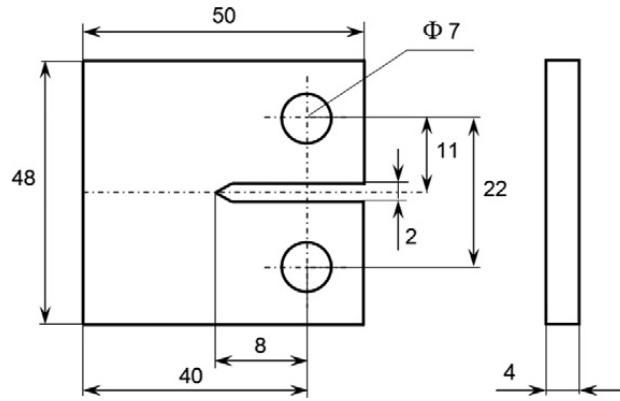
CT specimen for fatigue crack propagation tests, [9].
